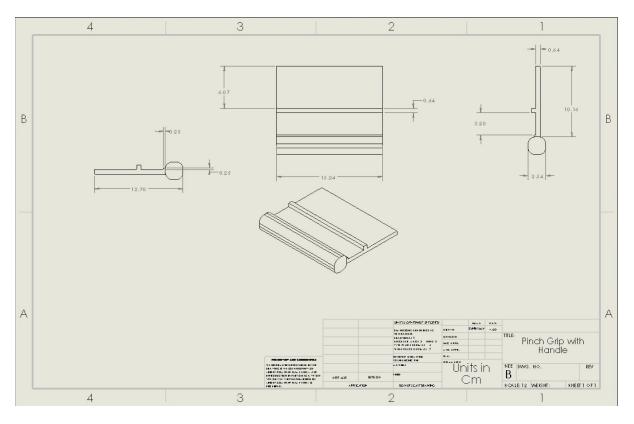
Detailed drawing of pinch grip with handle including dimensions in centimeters.
